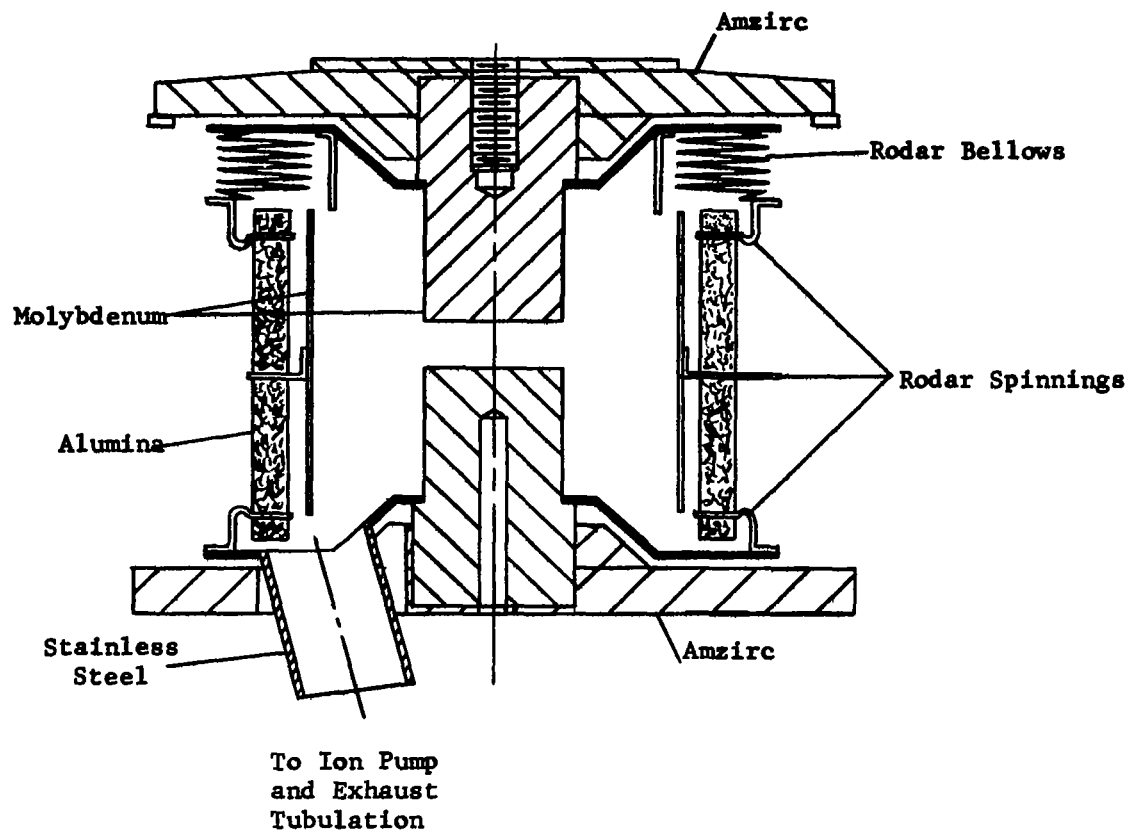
Sketch of Vacuum Capsule for AC Breaker and DC Contactor.
